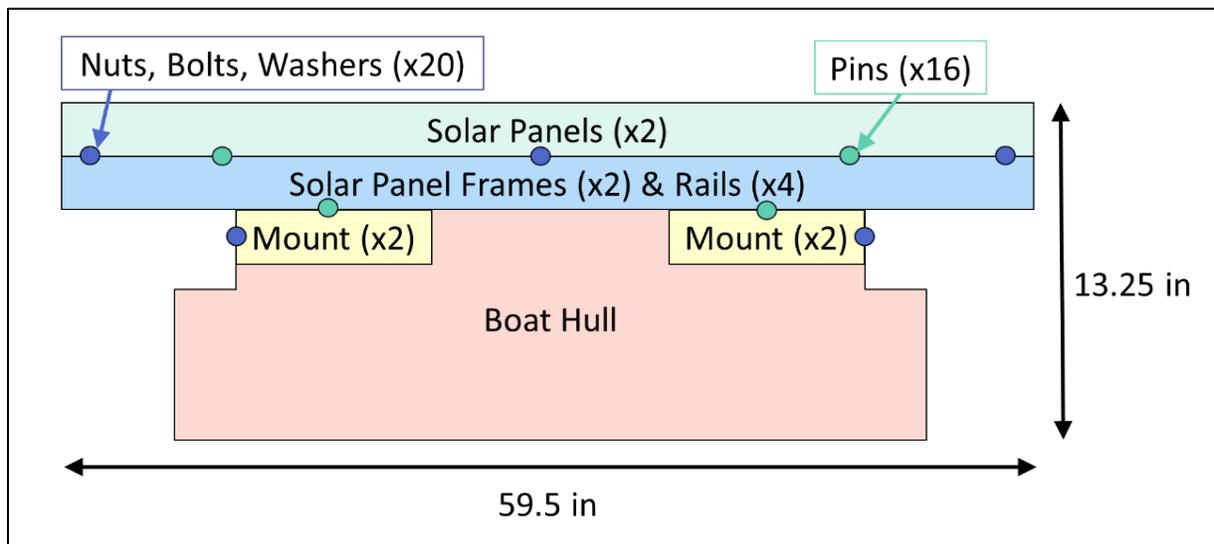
Mechanical Block Diagram of Solar Panel Frames
